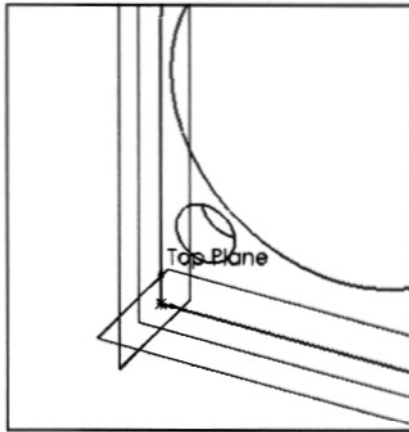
The Simple Hole is initially placed at the point we click at on the surface we click on.
